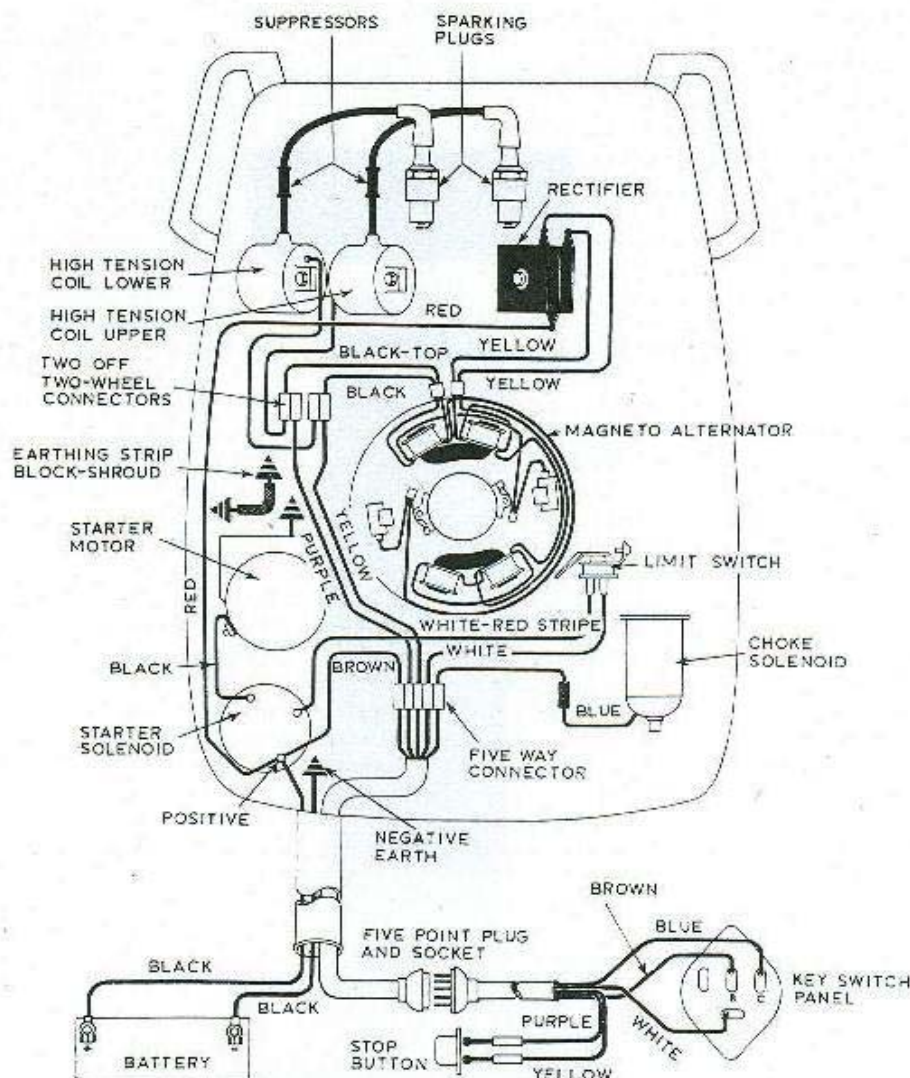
Electrical equipment and wiring diagram, 40 hp motor
